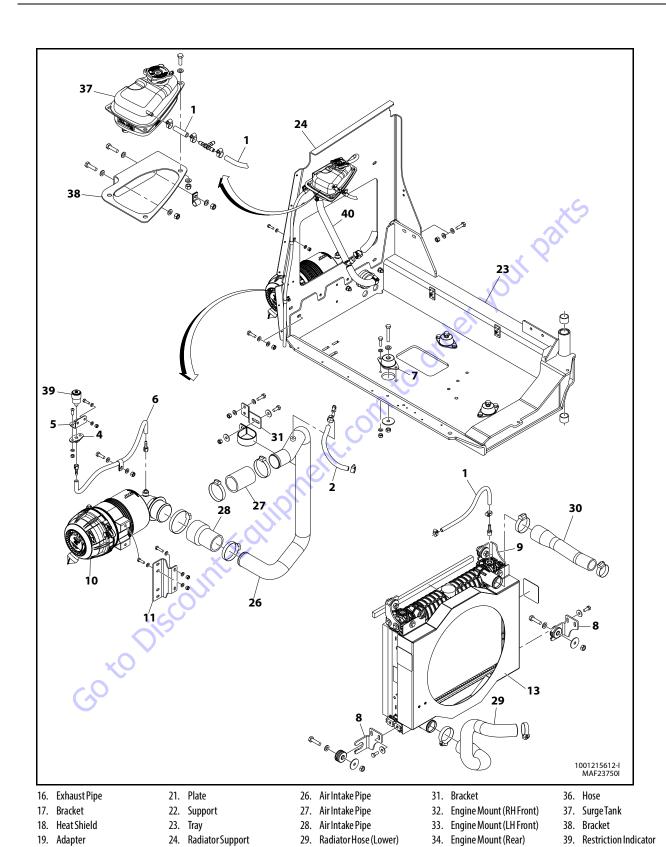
Ford Engine Assembly - Sheet 2 of 2
